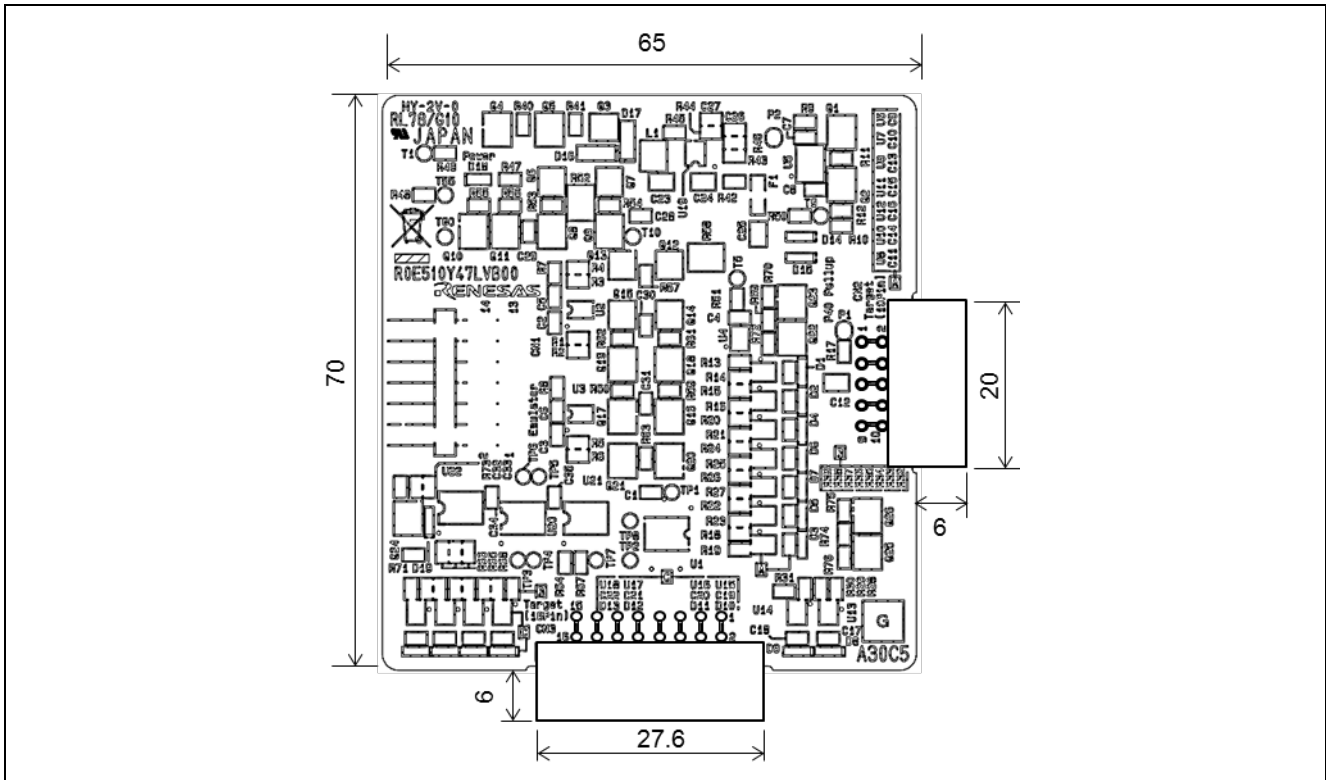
Dimensions of this product (R0E510Y47LVB00)
